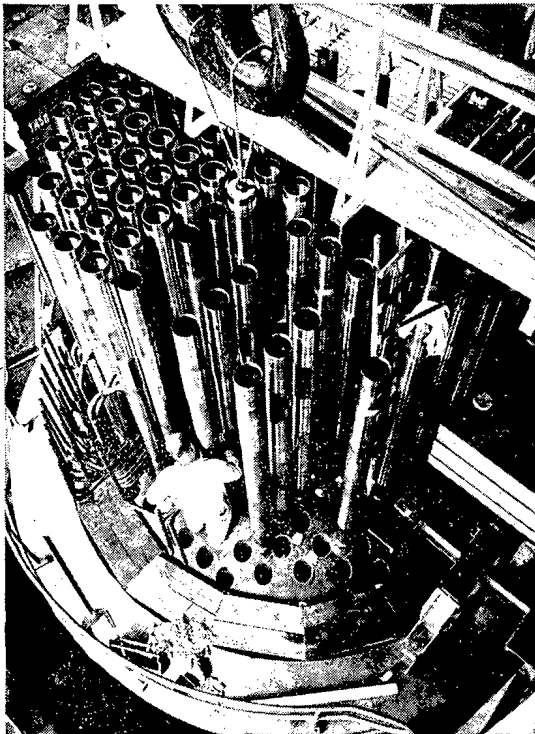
Welding of standpipes for technical channels and control and safety rod channels to the roof of the assembled reactor vessel.
